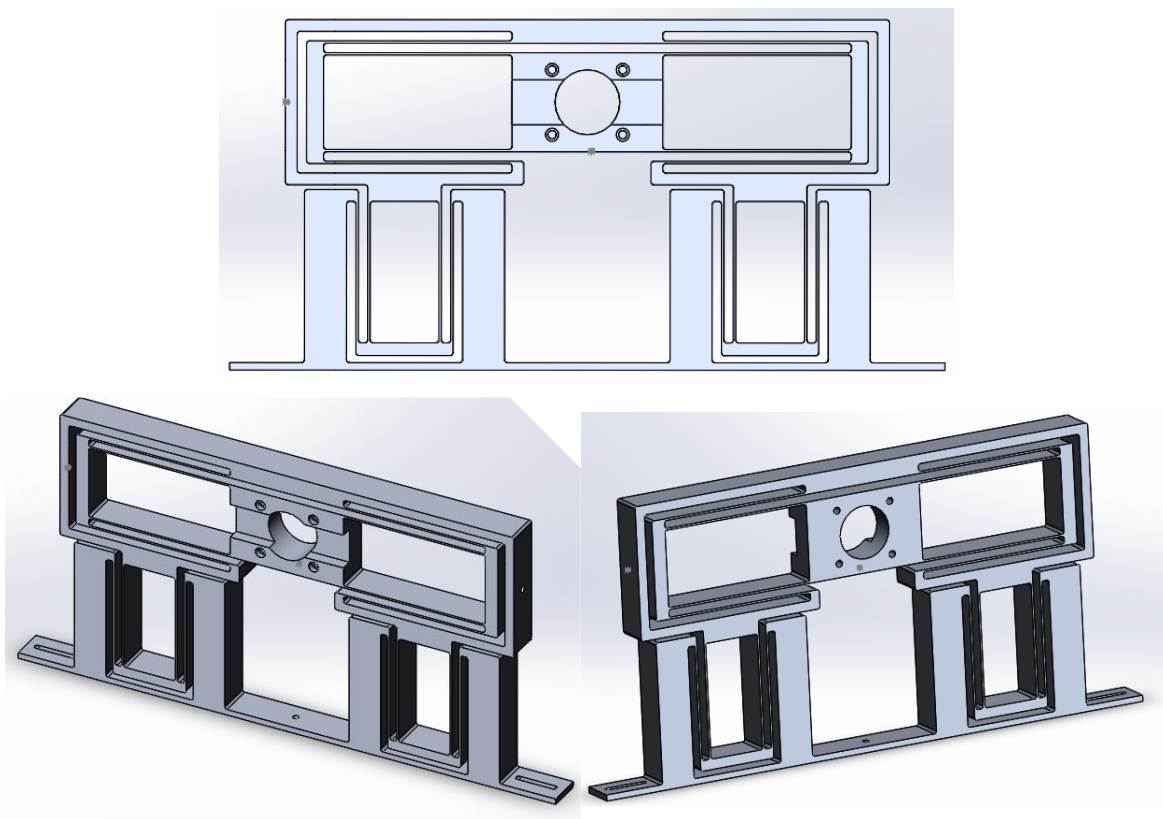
First prototype of new 2 DOF flexure design, showing three different views.
